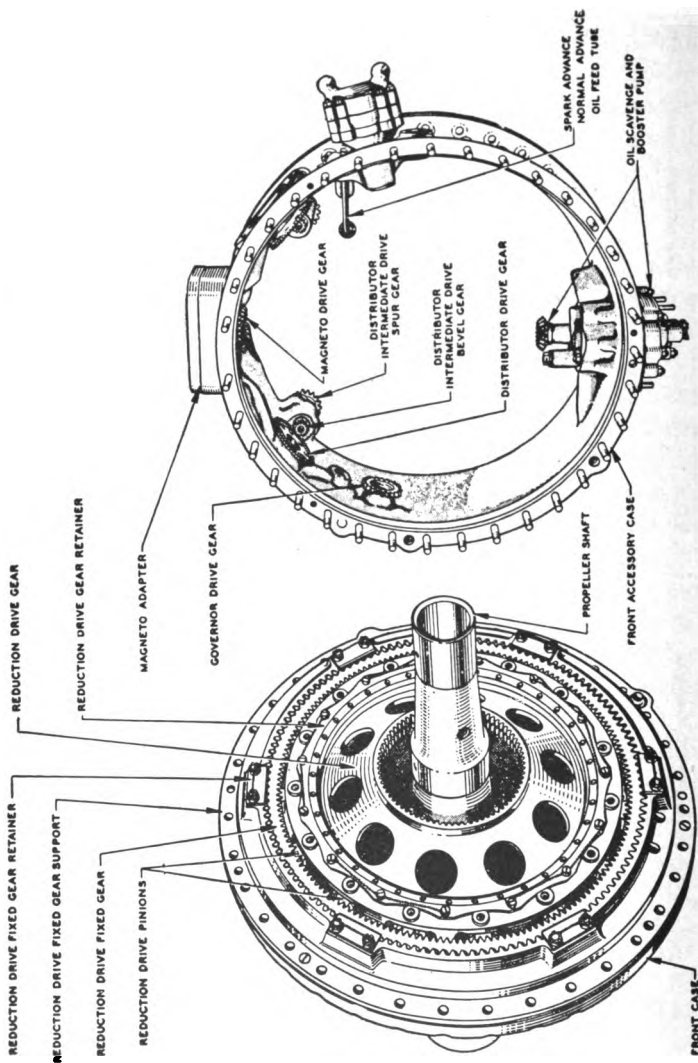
Rear of front section and front of front accessory section (20:9 reduction gearing).
